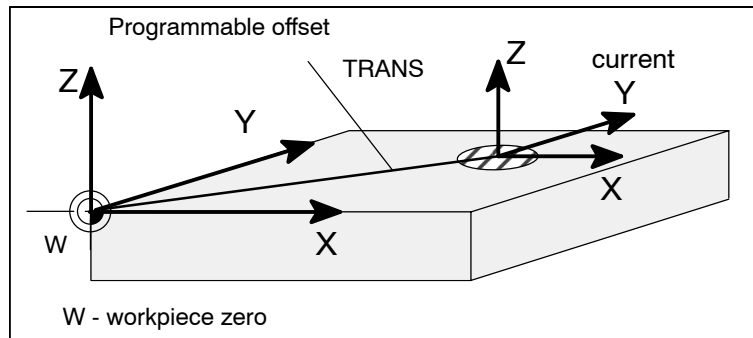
Coordinates on the workpiece; current workpiece coordinate system
